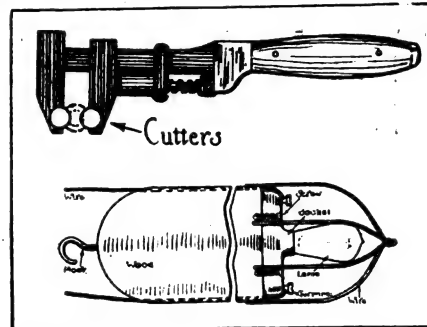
Wrench Pipe Cutter and Electric Bulb Cage.
